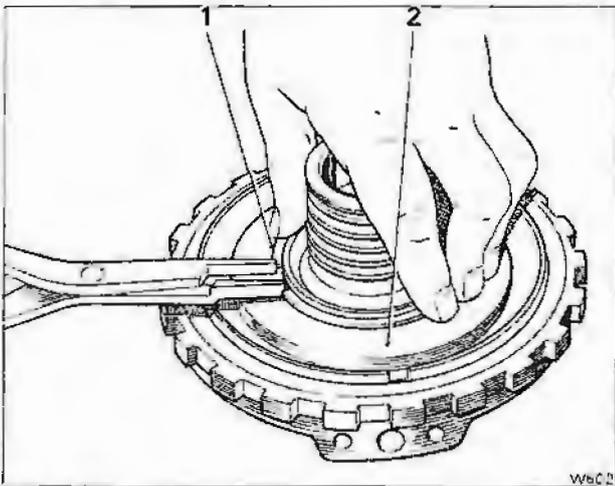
Removing and fitting the intermediate clutch piston snap ring
